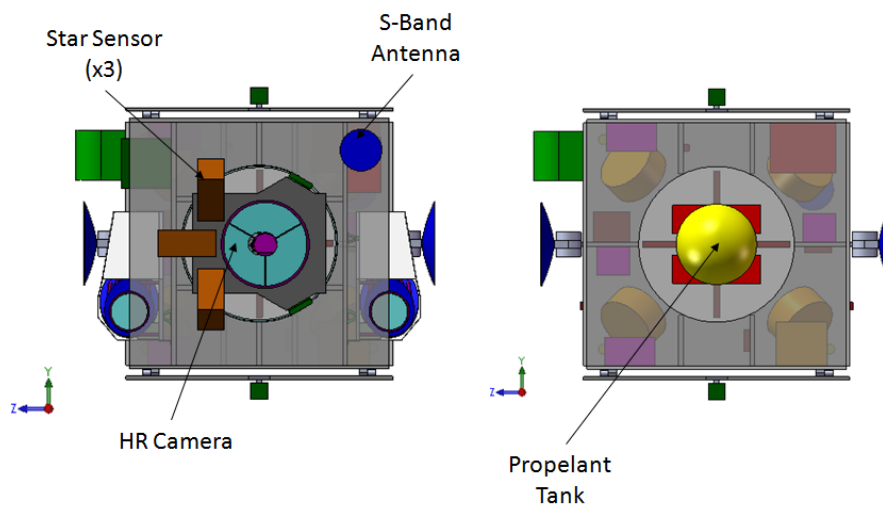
PM Top Panel & PM Lower Panel side views of GSST satellite, showing equipment layout for OPC3-2.
